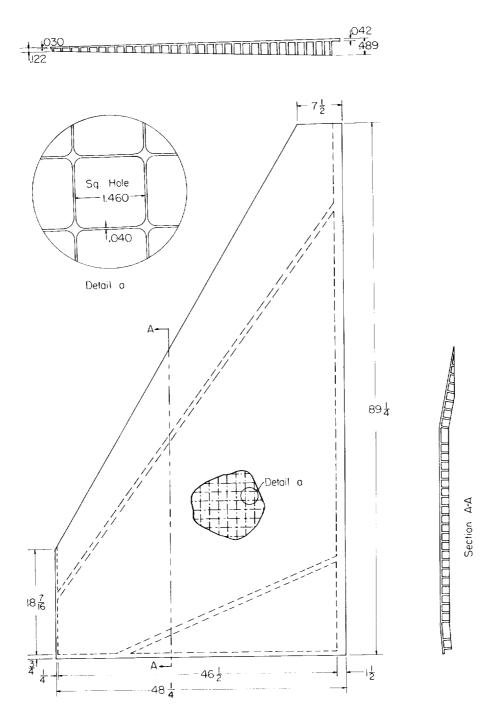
Nominal dimensions of the delta-wing specimen. All dimensions are in inches.
